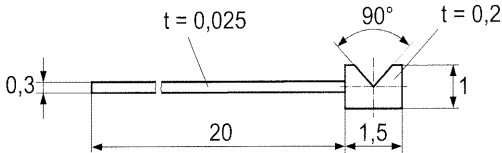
Geometry of the micro-milled cavity at the peening specimen.
